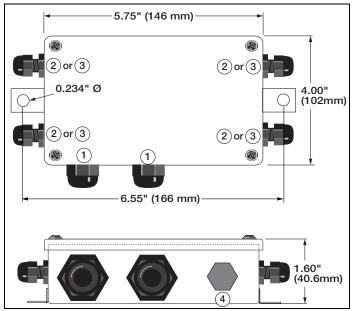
JB4ES and JB4SS Enclosure Dimensions
